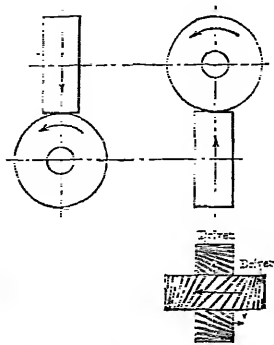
Right-hand spiral gears—counterclockwise rotation.
